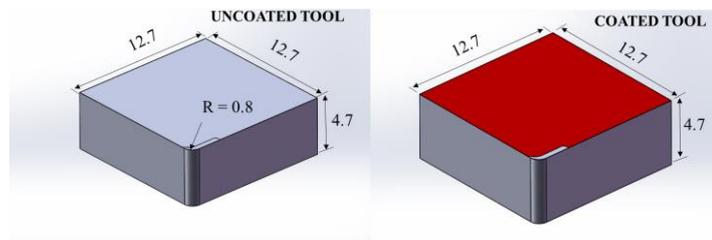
Fundamental dimensions of the 3-D coated and uncoated tool.
